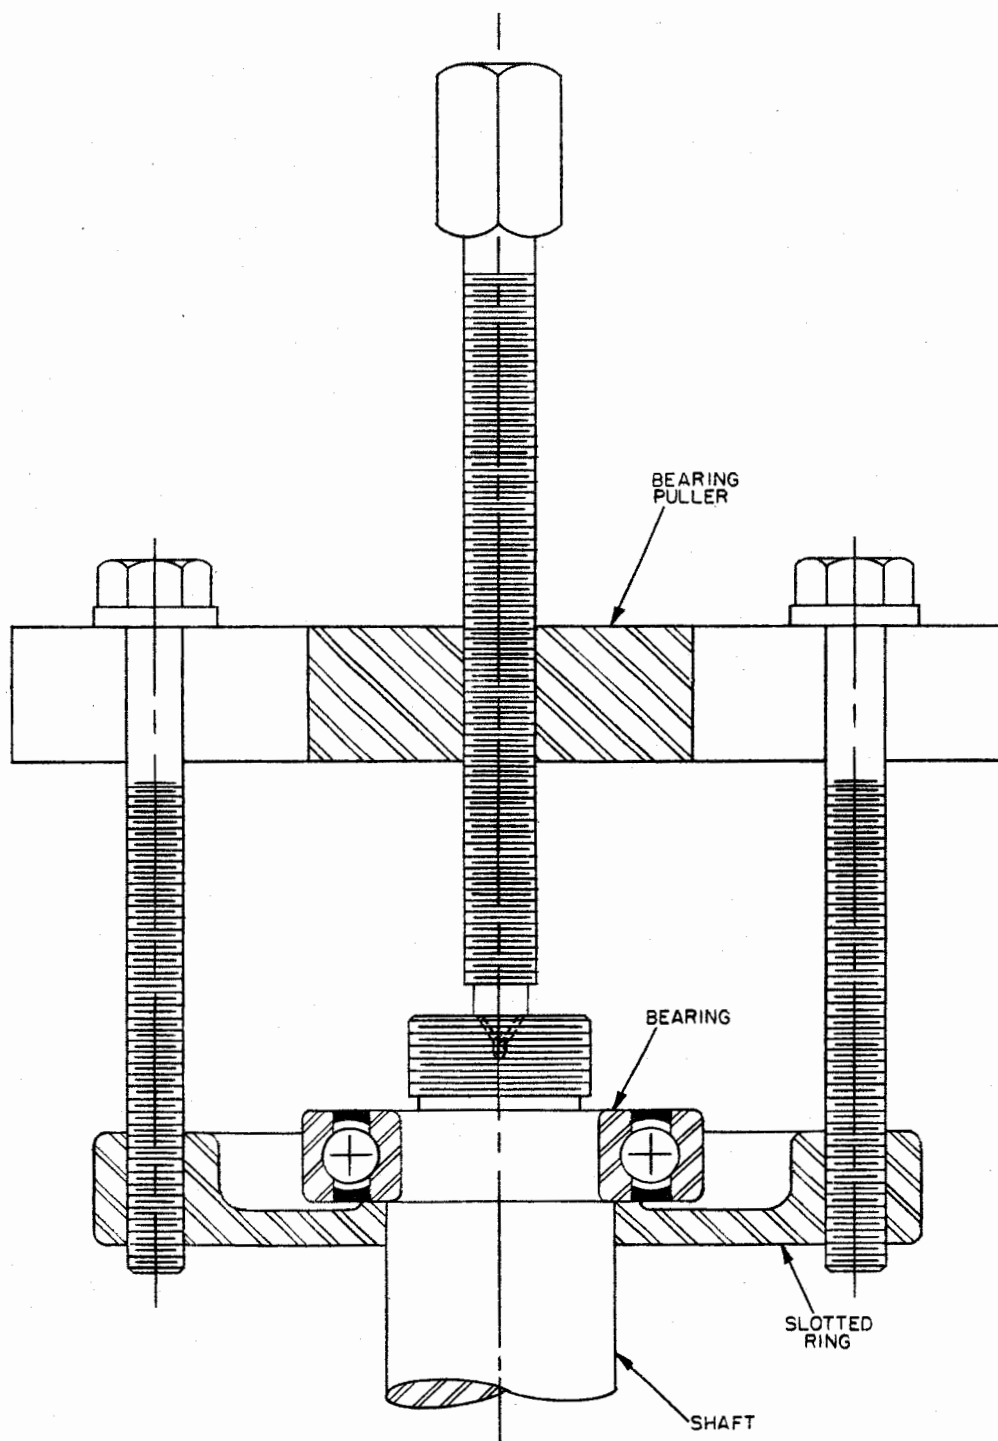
, Removing a Bearing with Bolt-Type Puller
